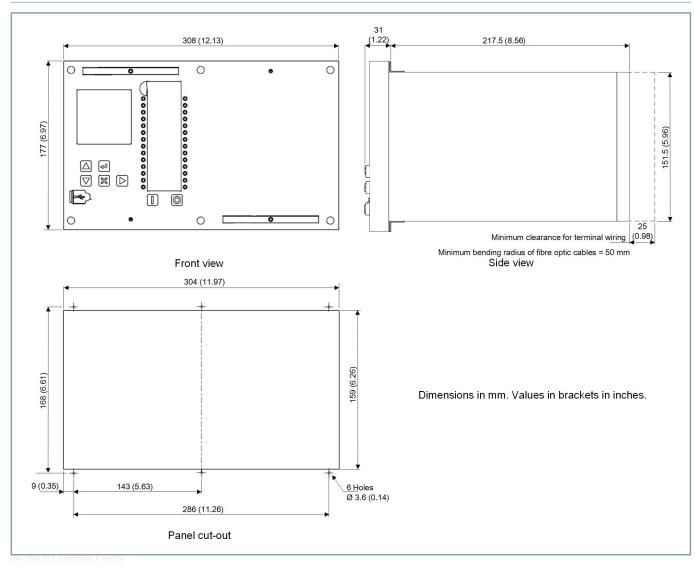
/2 Size 12 Case: Dimensions and Panel Drilling Details
